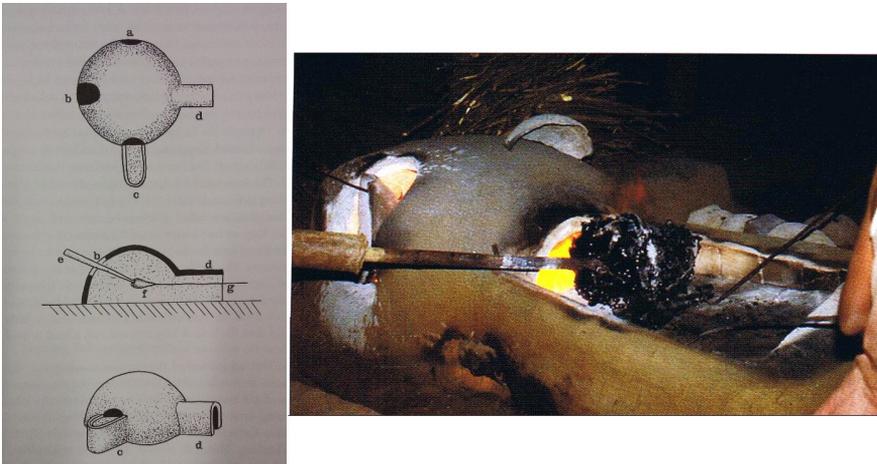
Tube-drawing furnace at Papanaidupet a: fuel port b: high port for the iron tube (lada) c: trough for melting glass d: port for drawing tube e: iron tube (lada) f: the cone of glass g: the tube being drawn out
